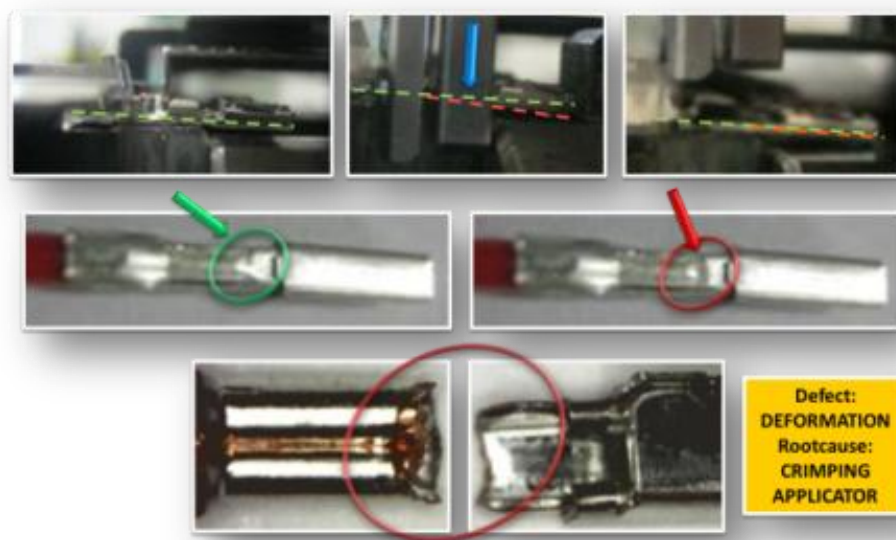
| Crimped Terminal Visual Inspection points
